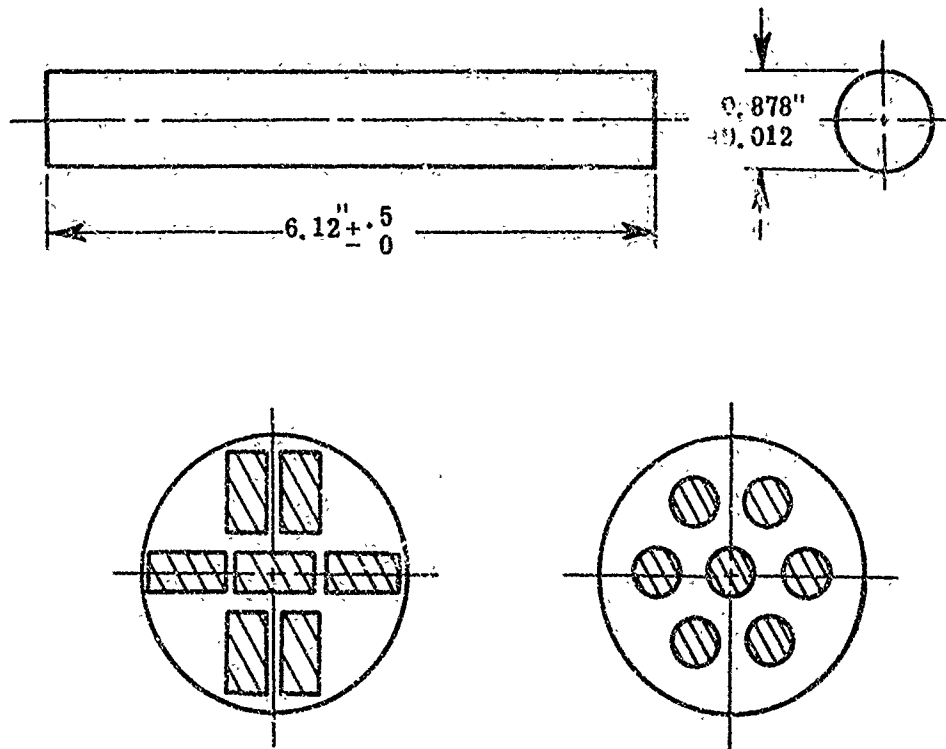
Configuration of Specimen Blanks 2A12 as Received from Coors and Cutting Plan for Removing Phase I Macro Tensile and Macro Flexural Specimens
